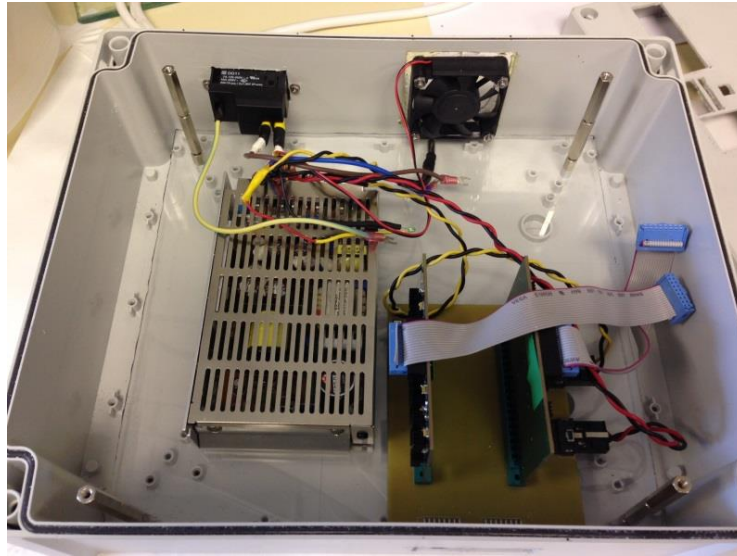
Bottom chassis for PSU and the amplifier PCBs.
